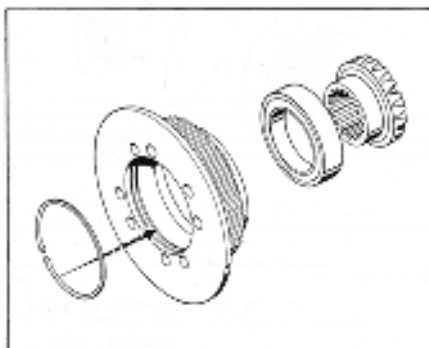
Forward Clutch Flange, Roller Bearing and Bevel Gear.
